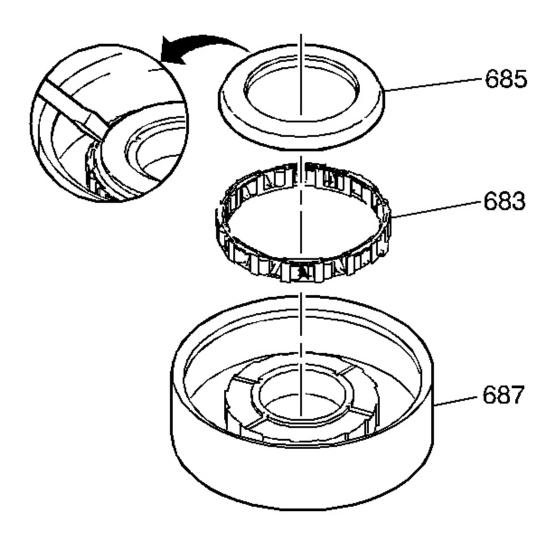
Prying Thrust Bearing Off 1-2 Support Drum Courtesy of GENERAL MOTORS CORP.
